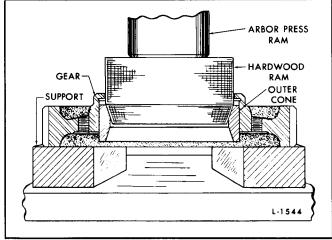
Hardwood Ram for Pressing Outer Bearing Race from Gear
